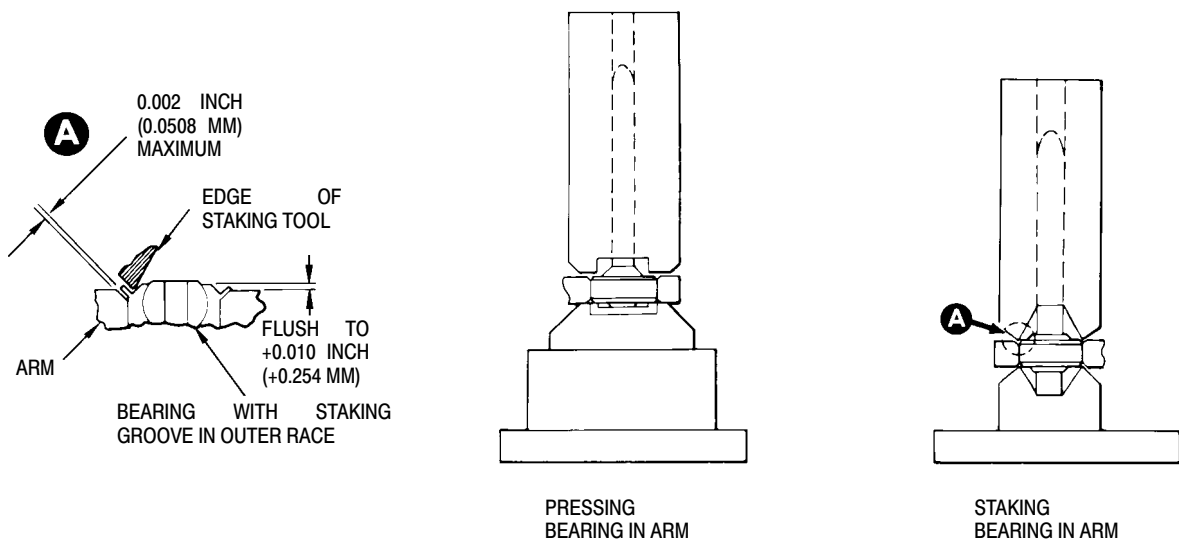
Bearing Replacement - Main Rotor Blade Damper Attach Fitting
